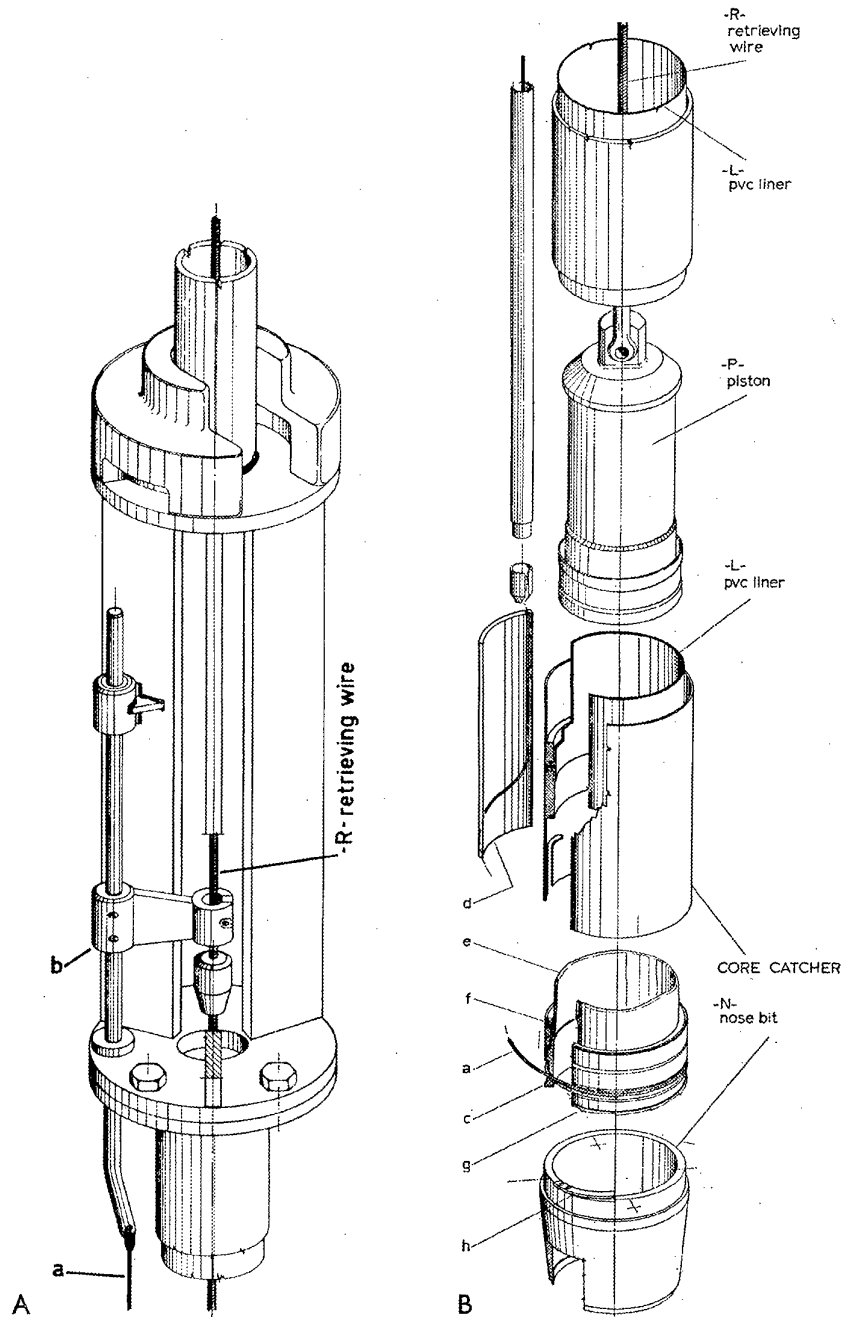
Schematic drawing of the SACLANTCEN Sphincter corer (a) driving mechanism and retrieving wire and (b) core cutter nose, split piston, liner and retrieving wire.
